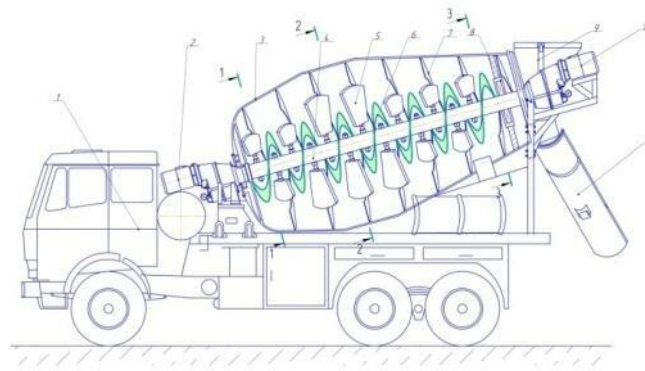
Gravity-action concrete mixer truck with spiral-blade shaft: 1 – base vehicle; 2 - hydraulic drive for drum control; 3 – drum; 4 – shaft; 5 – shaft blades; 6 – spiral auger; 7 – spiral blades on the drum body; 8 – supports for the spiral-blade shaft mounting; 9 – loading hopper; 10 – hydraulic drive for the shaft with spiral blades; 11 – discharge chute [29, 30].
